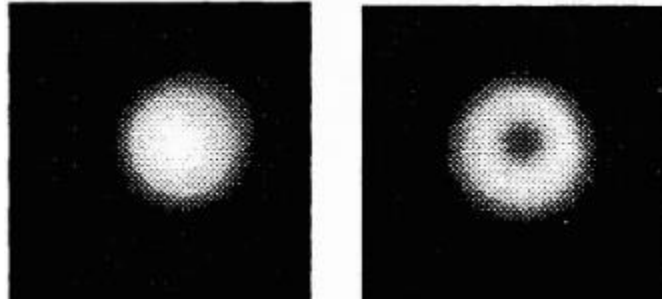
Example of a Good Weld (Left) and Bad Weld (Right) Using Infrared Camera [83]
